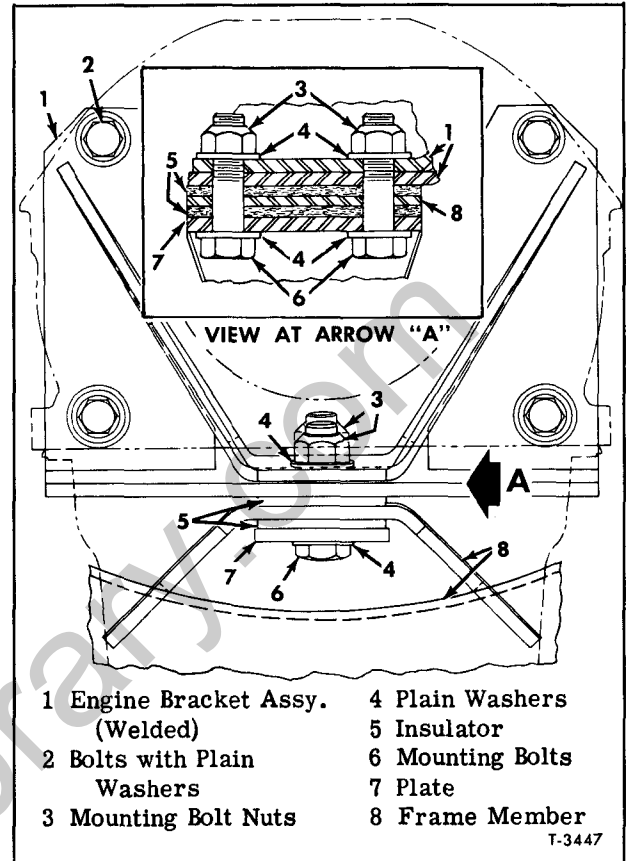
Engine Front Mounting on Conv. Cab 90 Series (8V-71 Diesel Engine)
